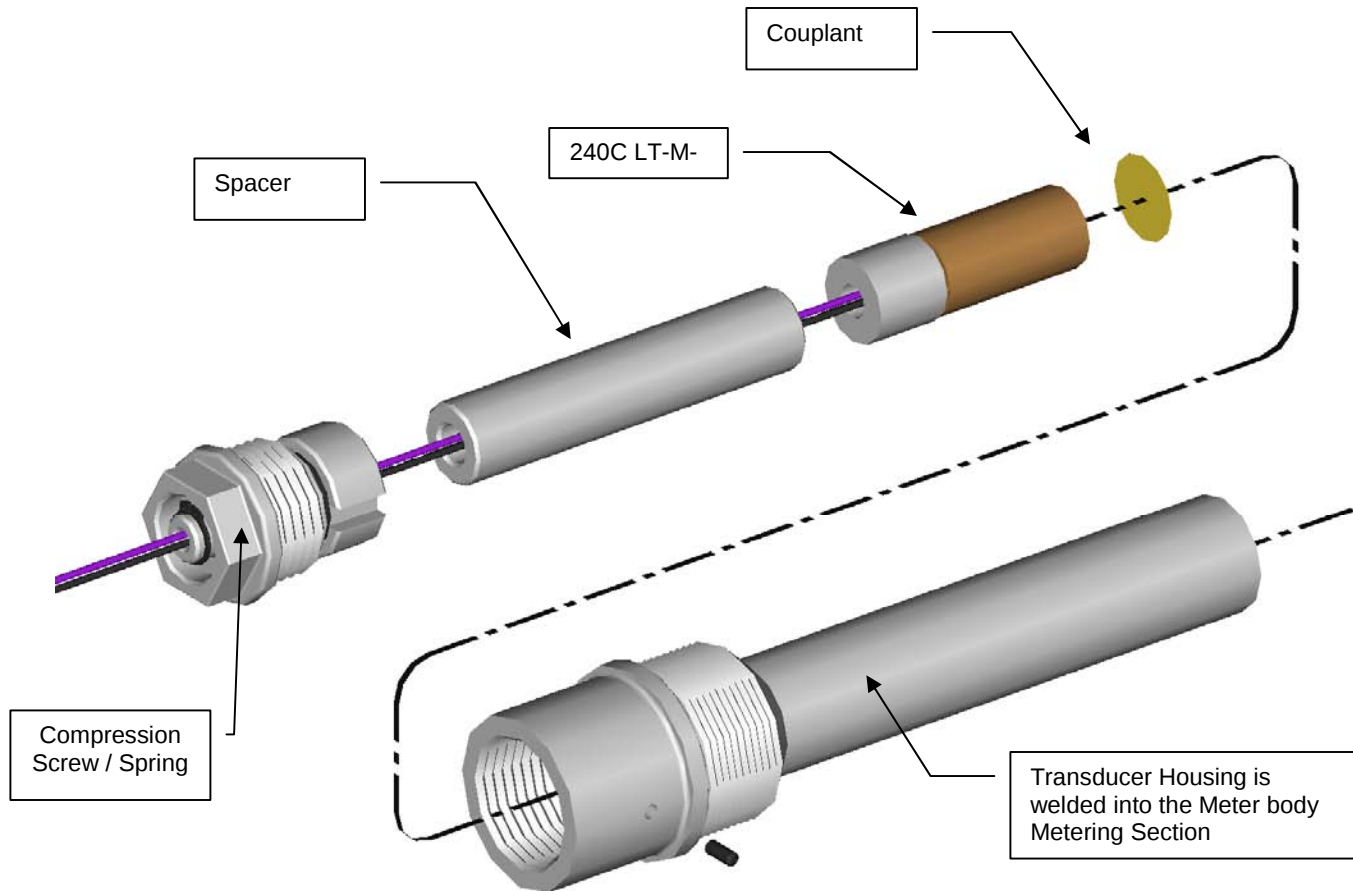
Cryogenic Transducer Assembly Construction Outline
